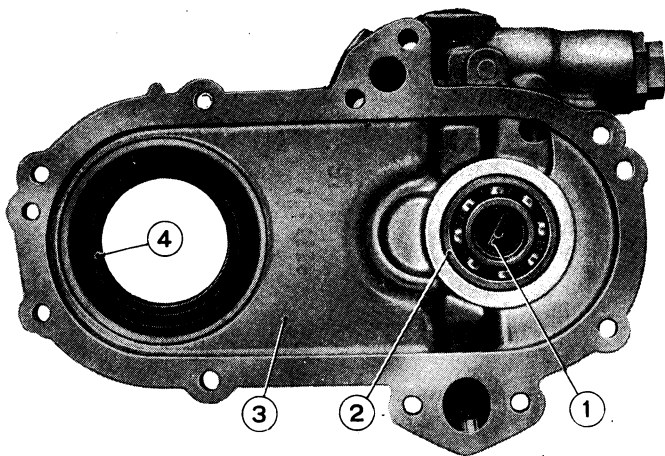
118 B.000 engine oil pump - Interior view.
